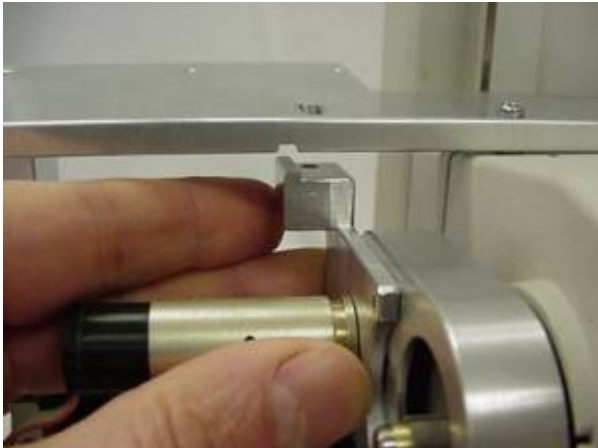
When gears are properly aligned use the 7/64" Allen wrench to tighten the screw that secures the zoom motor.
